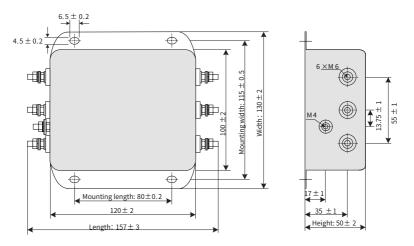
Mounting dimensions of the simple EMC filter (unit: mm)
